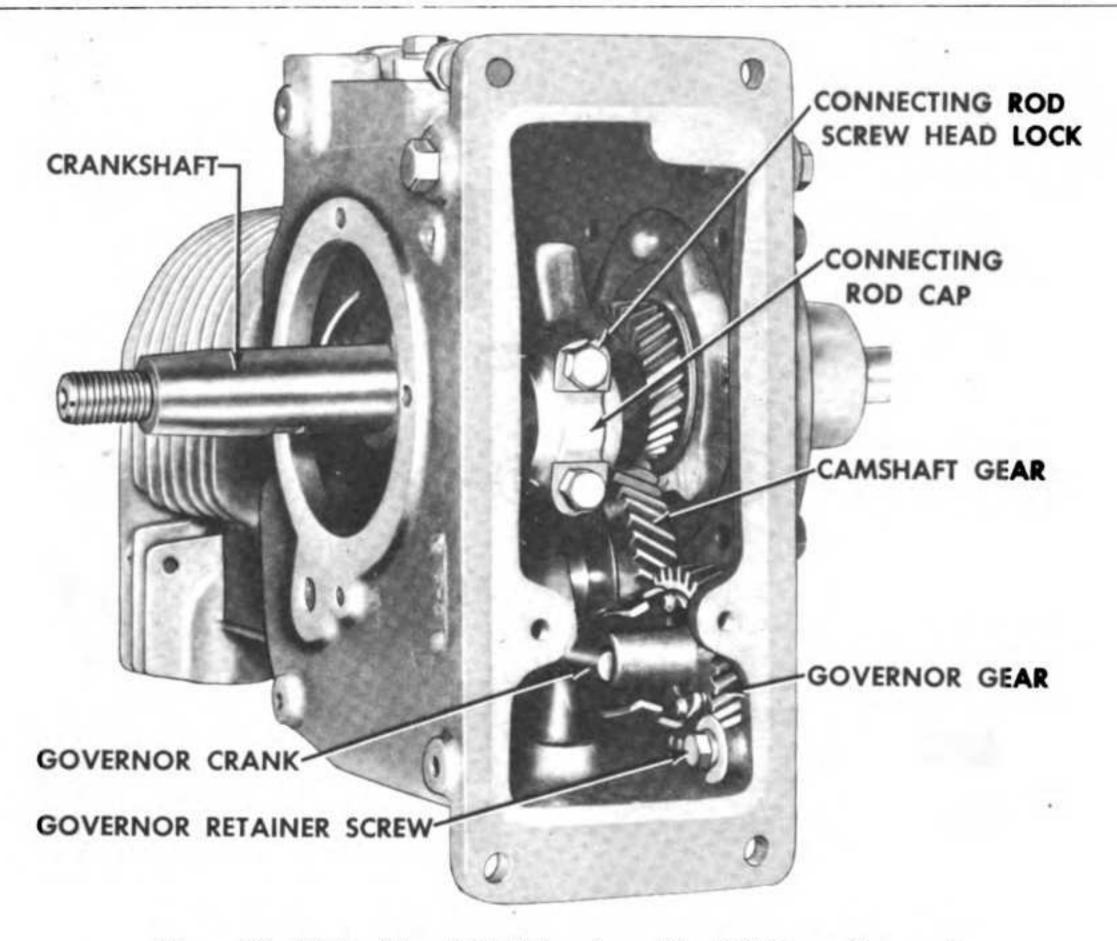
Underside of Cylinder Assembly, Oil Pump Removed
